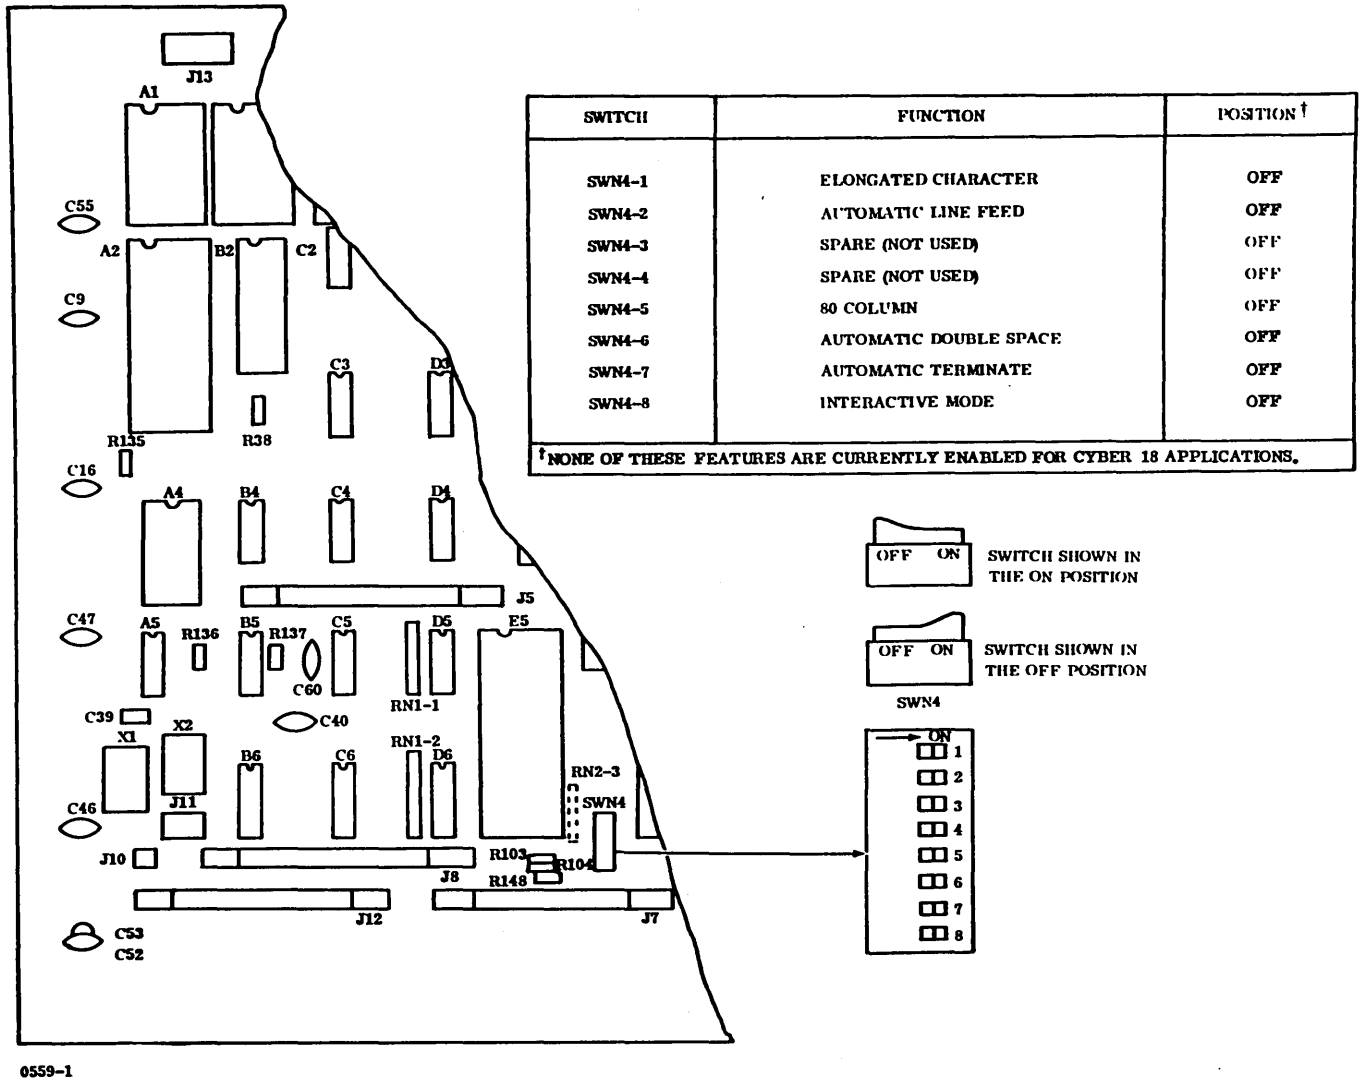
Controller and Print Head Board Switch-Selectable Features
